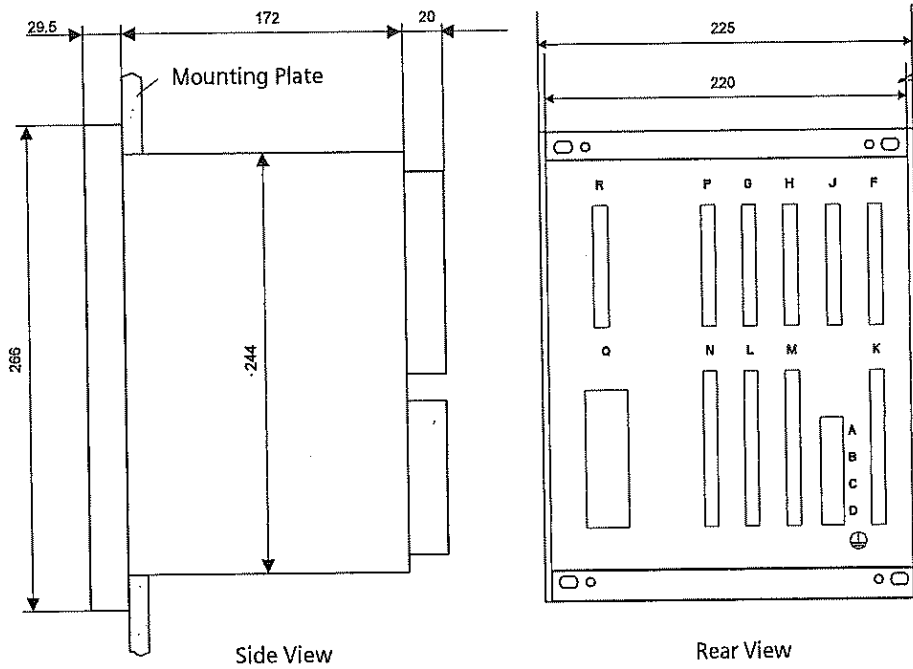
Dimensional drawing for SIPROTEC 7SJ66 (housing size 1/3)
